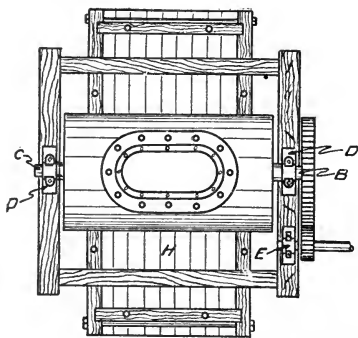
B—TOP VIEW OF TUMBLING BARREL
